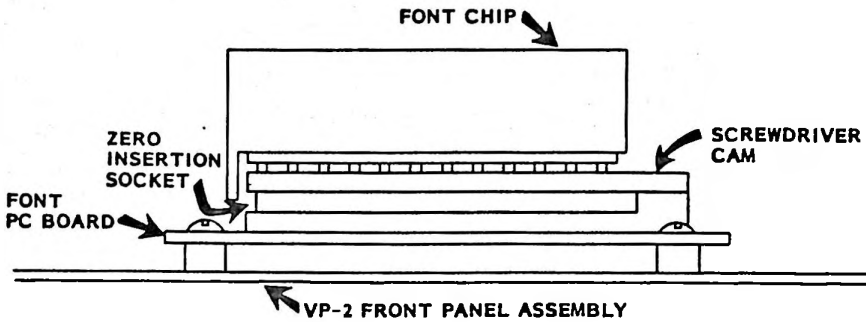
Font Chip Mounted In Zero Insertion Force Font Socket
